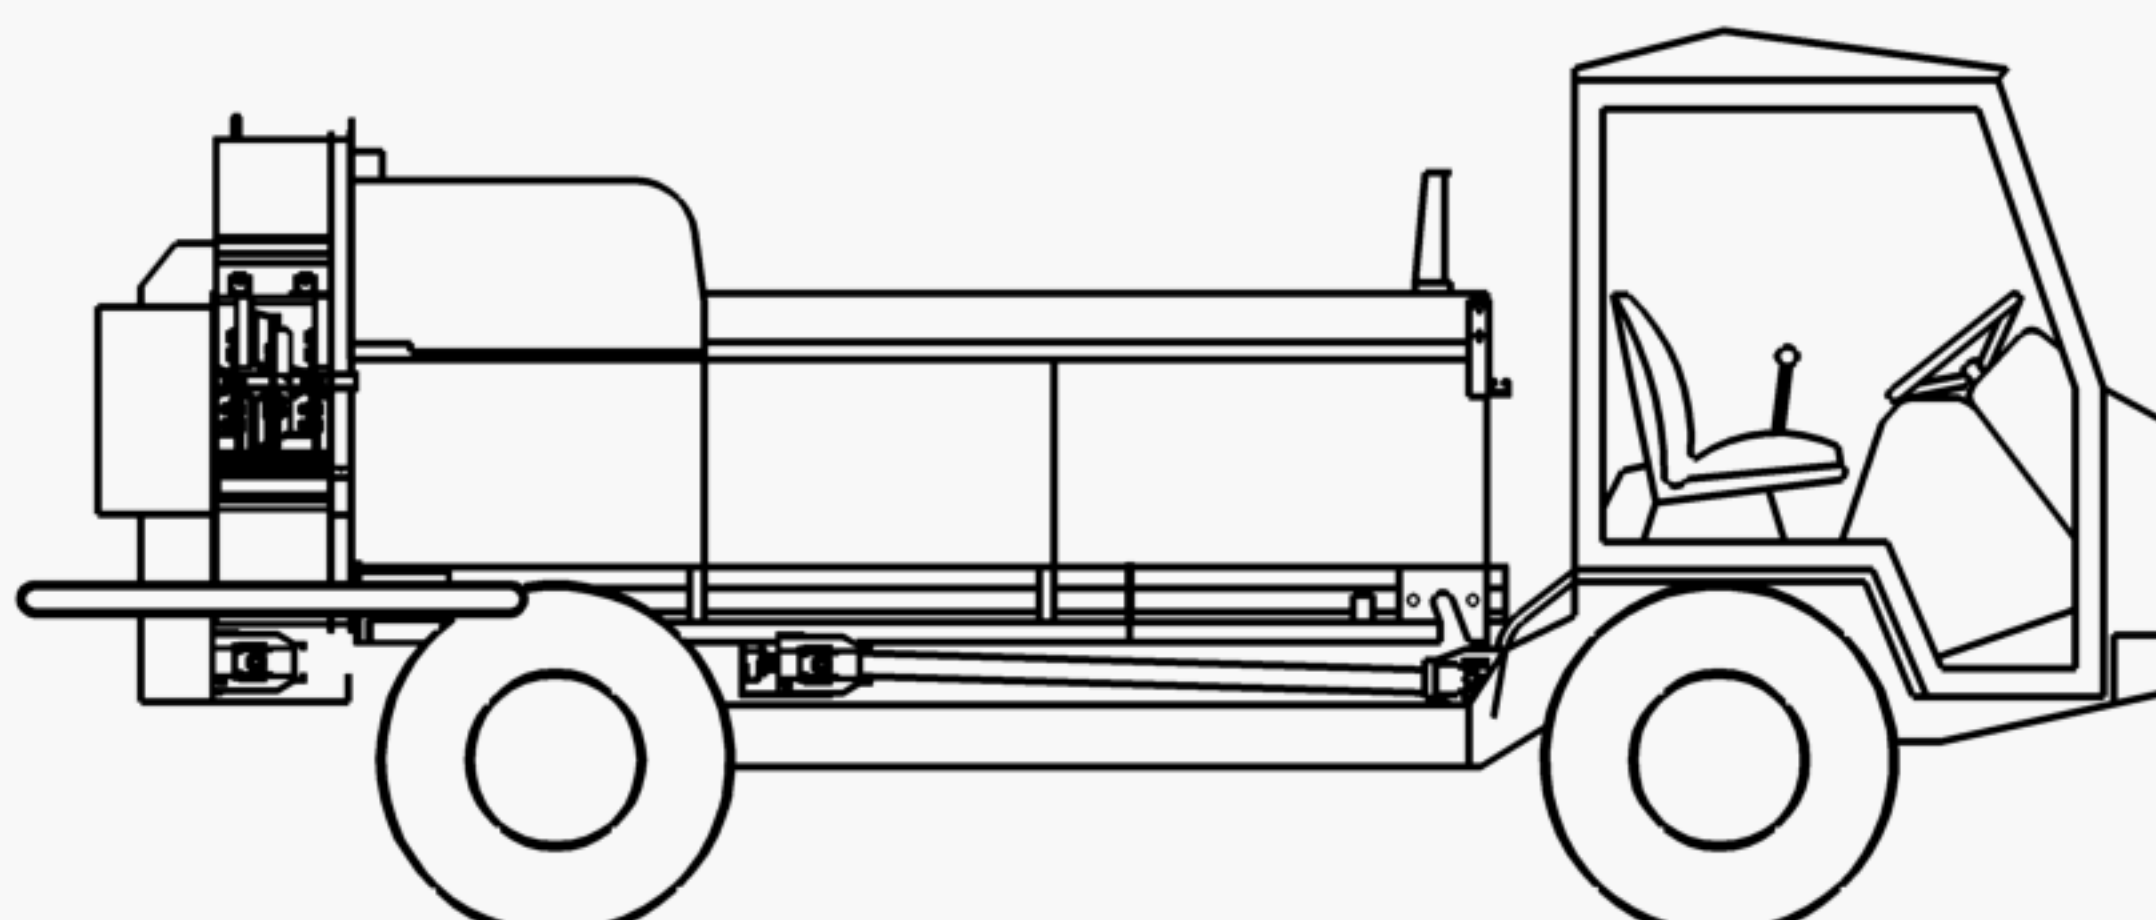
Examples of horizontal axes rotors rear spreading devices
